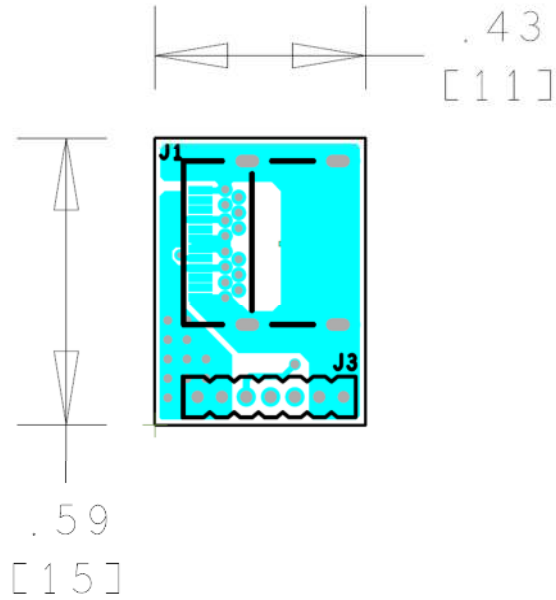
DER-837 RevD USB Type-C Connector PCB Layout, Top.
